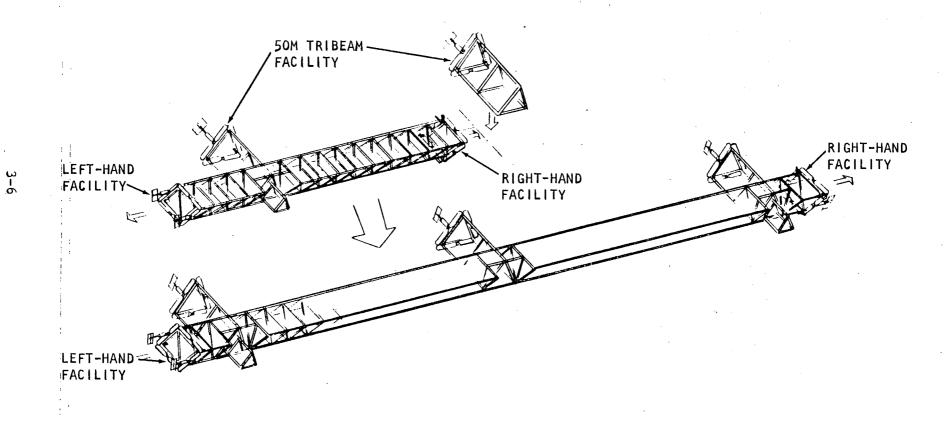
Assembly Concept SCB/EOTV Fabrication Facility
